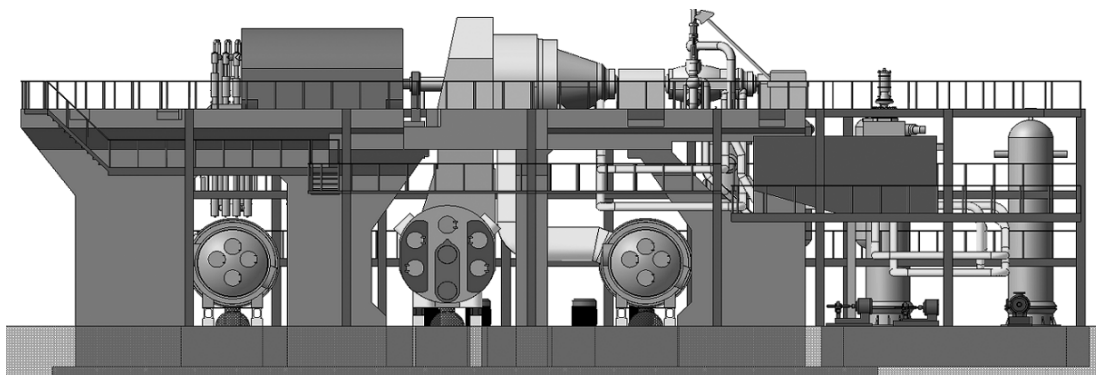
Layout of the Tp-100/110-90 steam turbine unit.
